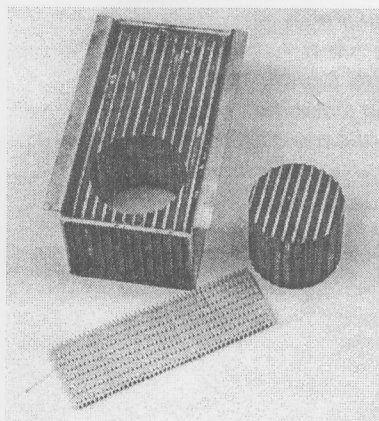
A view of the test sample being cut out of the heat exchanger core and the fin surface sample
